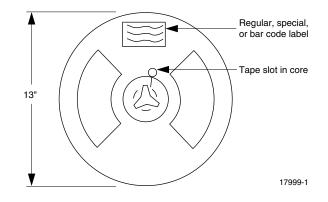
Tape and Reel Shipping Medium (1000 units per reel)
